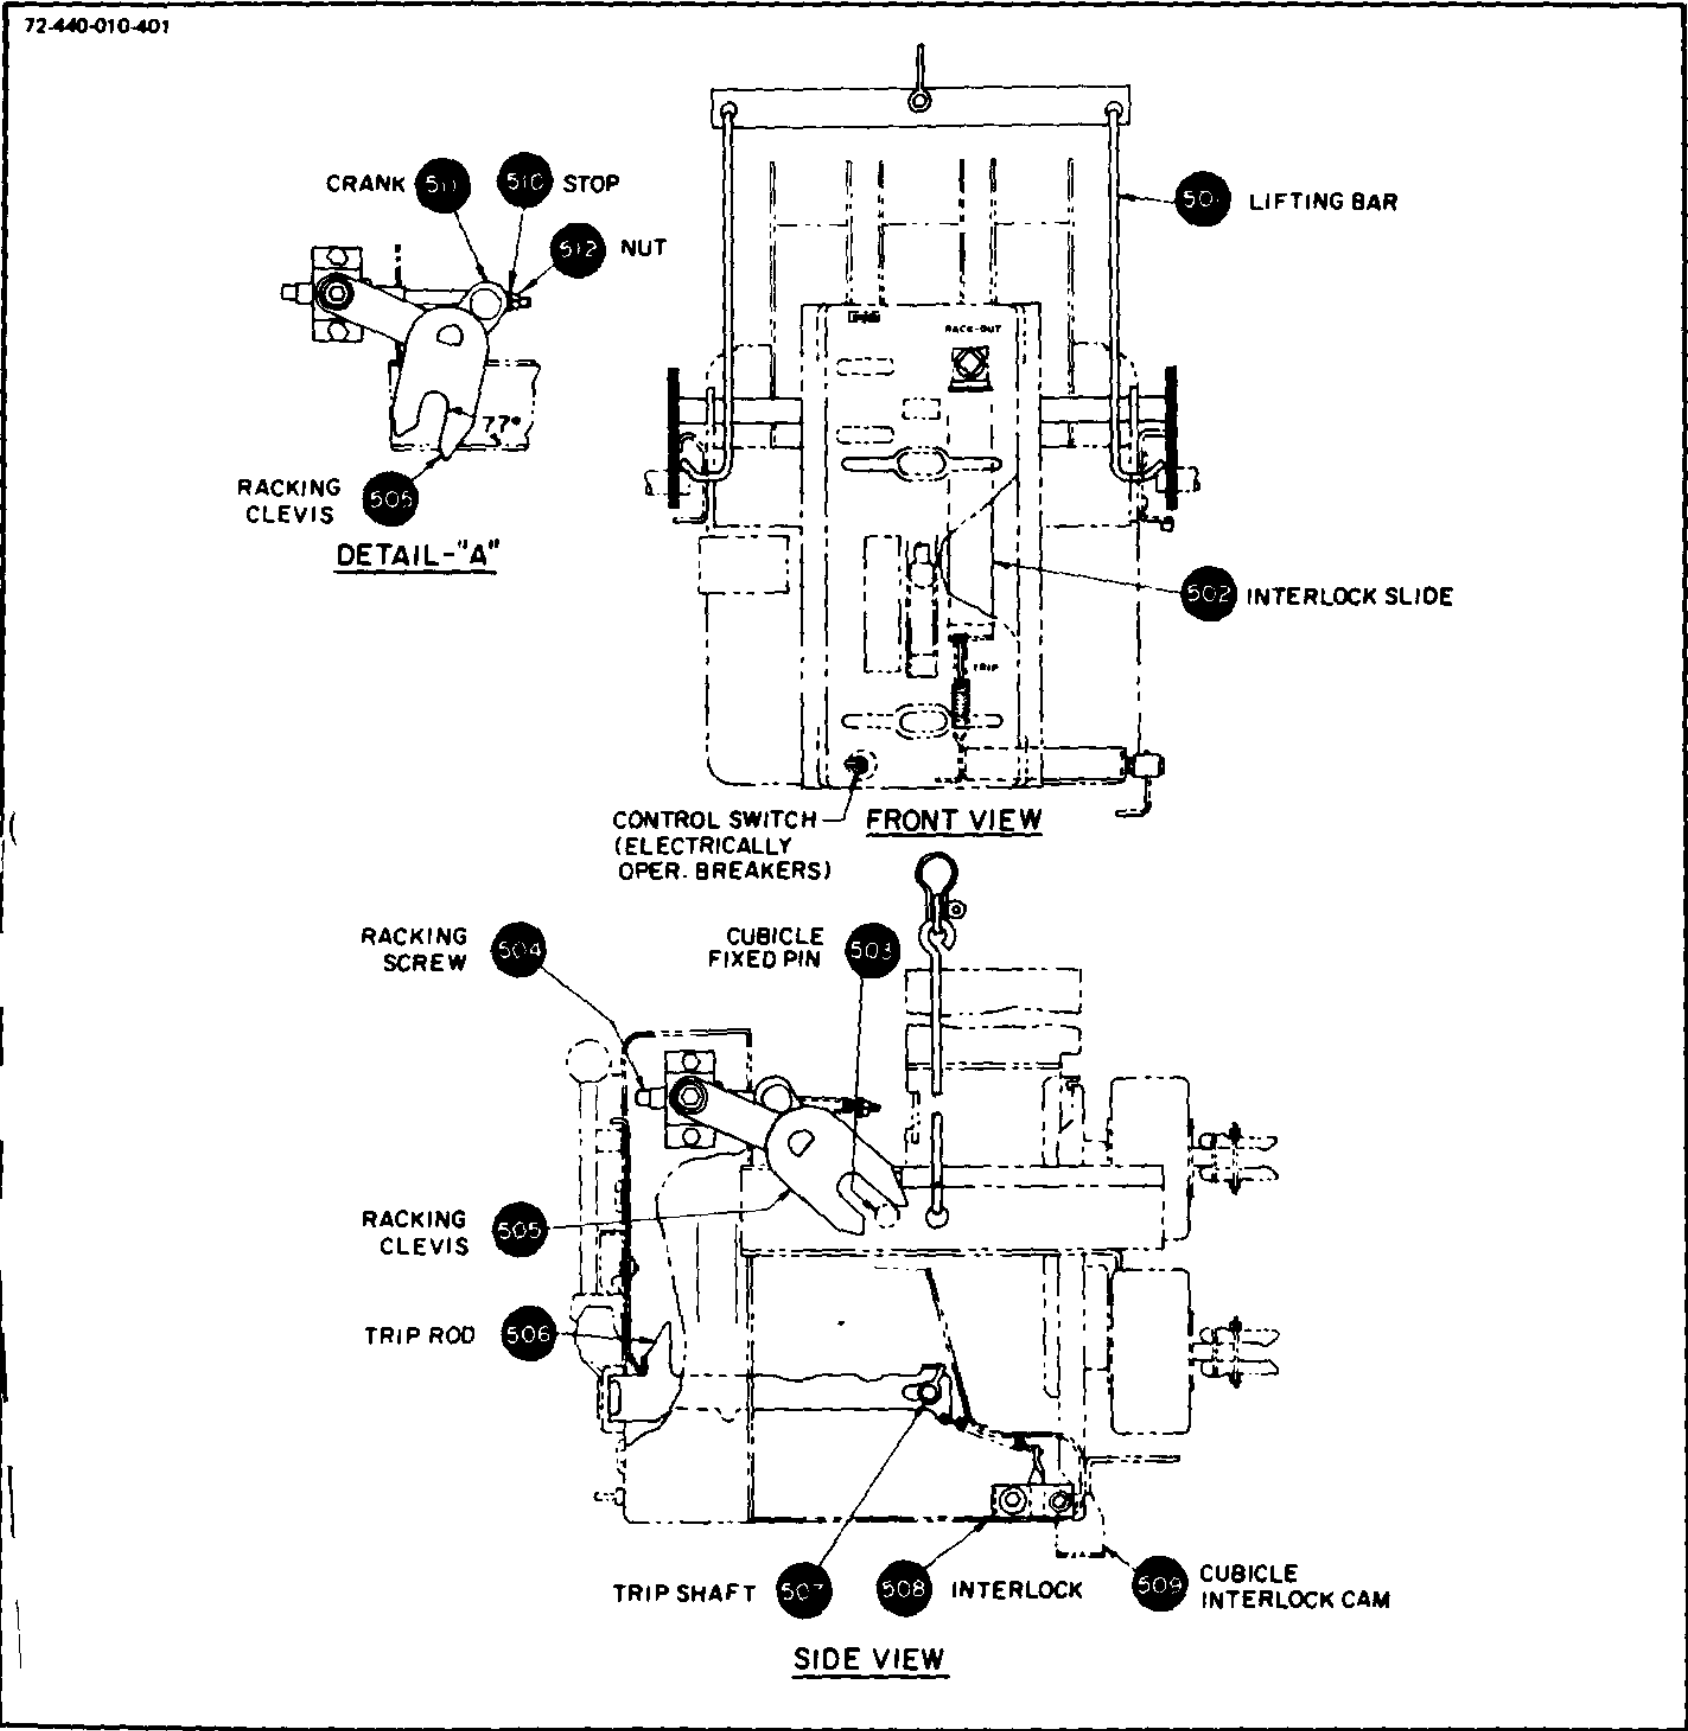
Typical Racking Mechanism and Drawout Interlock
